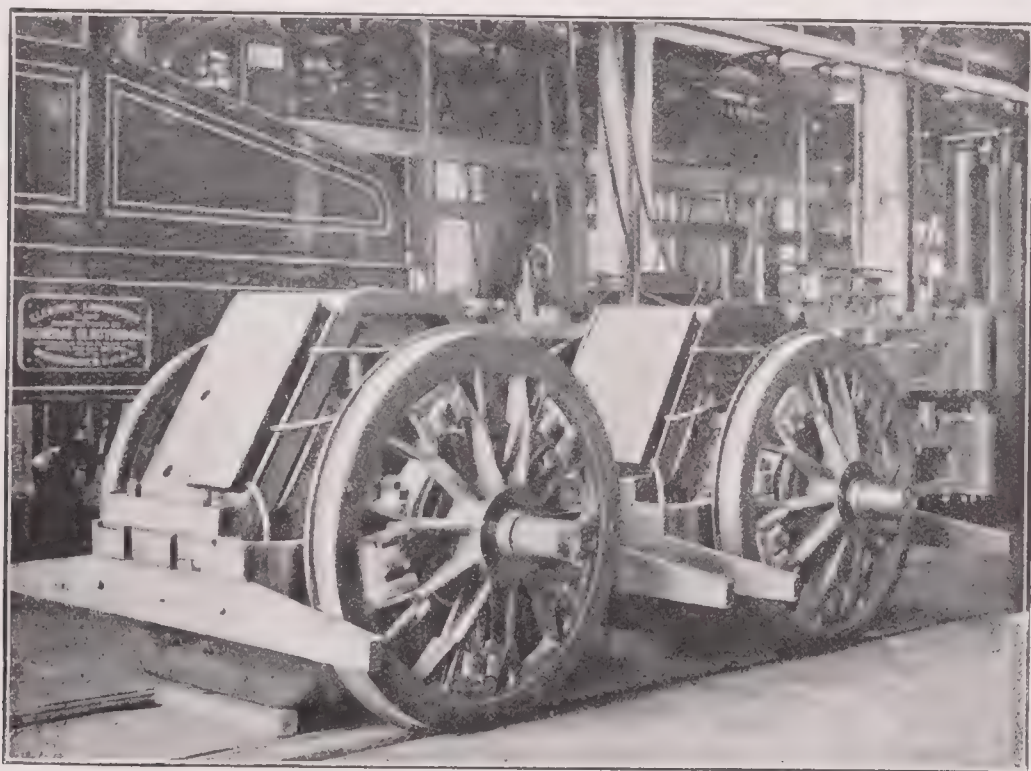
A. TRUCK OF BALTIMORE AND OHIO 1896 GEARLESS LOCOMOTIVE, SHOWING MOTOR IN PLACE.
